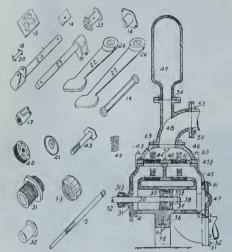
SECTIONAL DETAILS AND PARTS OF TYPICAL "SMART-TURNER" PUMP.
